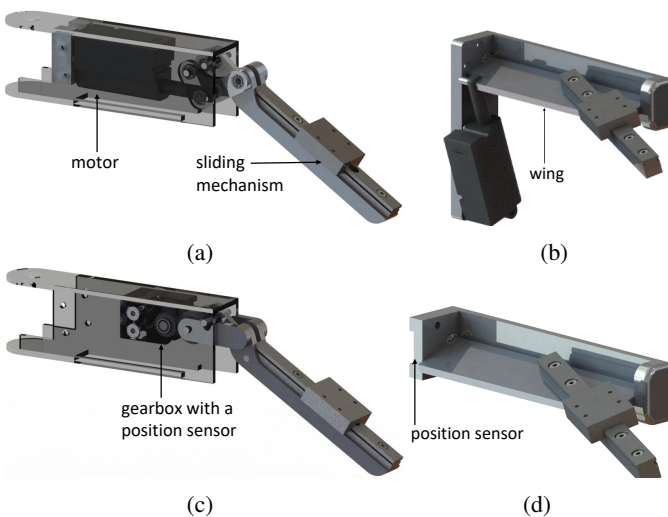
Finger support mechanisms of the device; (a) motor mechanism of the phalanges, (b) motor mechanism of the thumb, (c) sensor mechanism of the phalanges, (d) sensor mechanism of the thumb.
